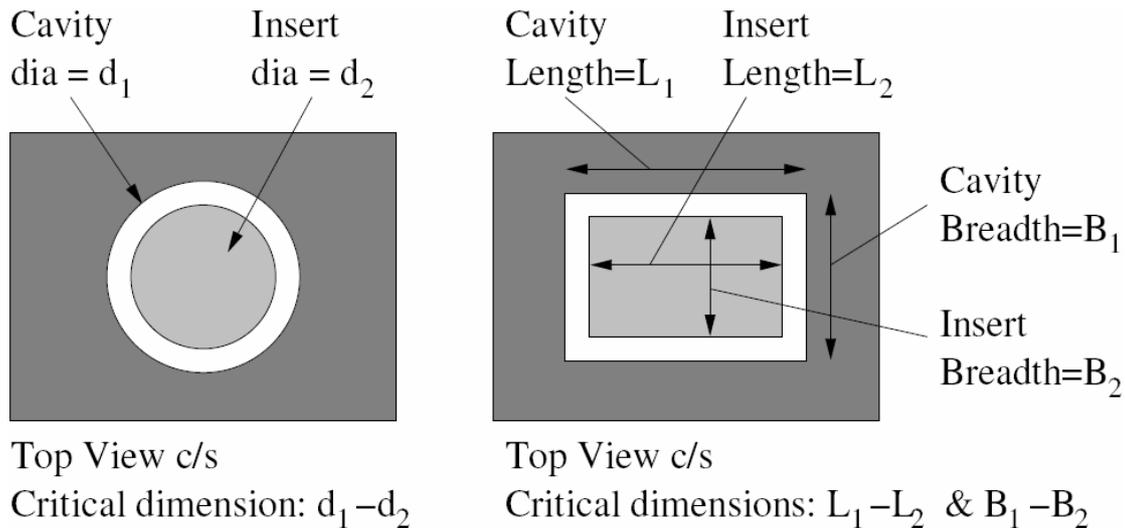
Critical Dimensions for Fits between Inserts and SL Parts
